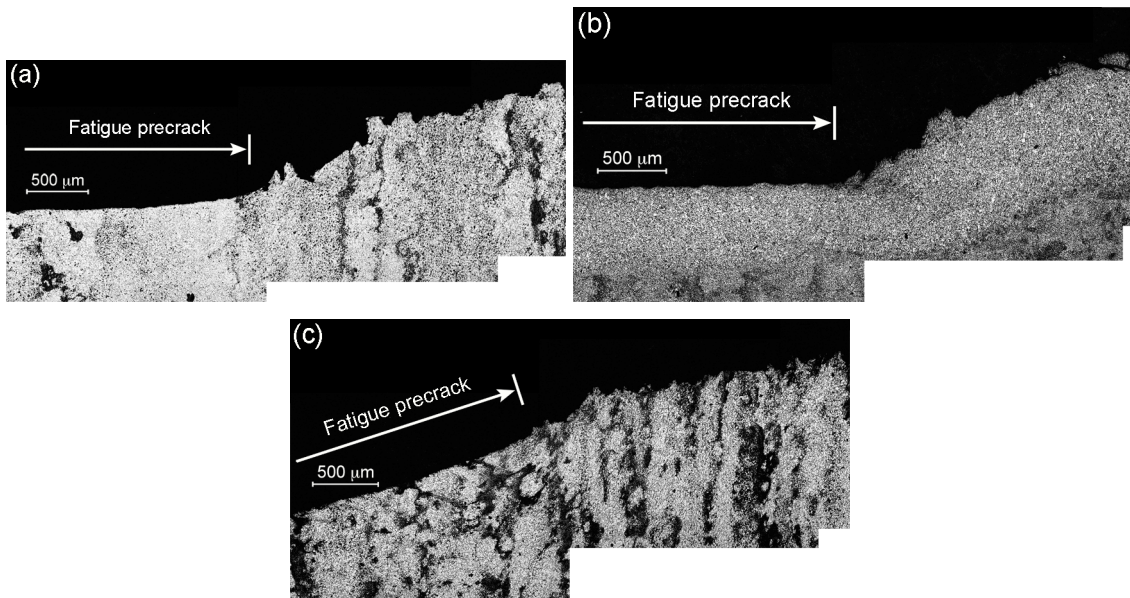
Fracture crack paths. (a) Base Material, (b) Weld Metal, (c) Heat Affected Zone.
